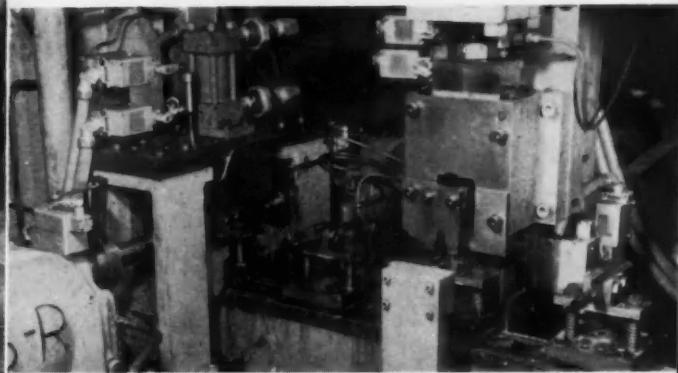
Two dedimpling and sizing stations along with four indexing fixtures, each holding one tube, are shown here near the start of the processing line. Fixtures are advanced along the track by a continuous chain.
